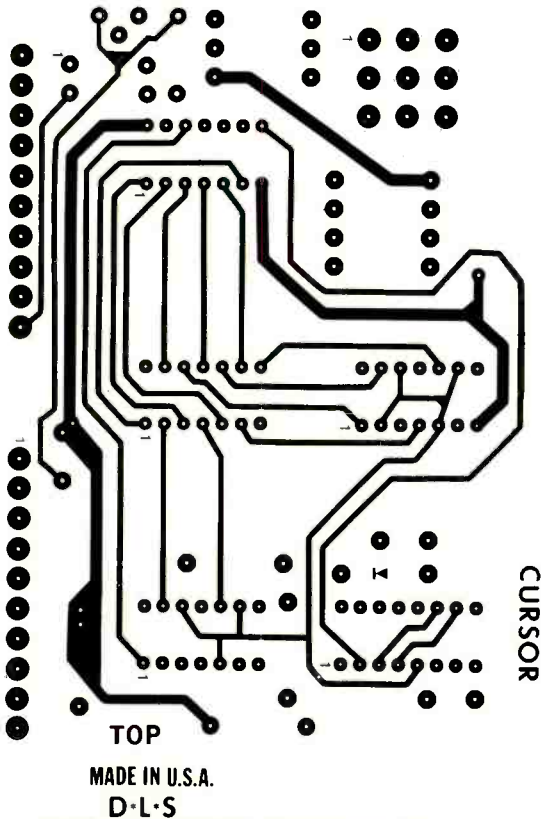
FOIL PATTERN of component side of double-sided board shown full size.
